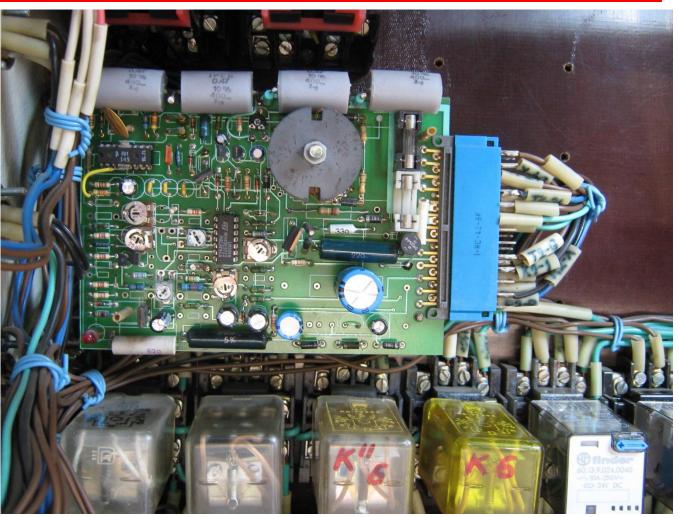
Soldering wire connections and terminal pads on a PCB of a DC servomotor drive
